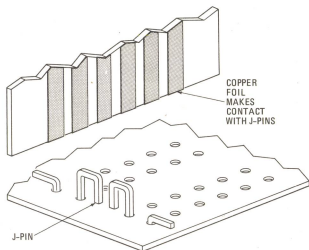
HOW J-PINS CAN BE USED as edge-connector socket pins for a PC board.
